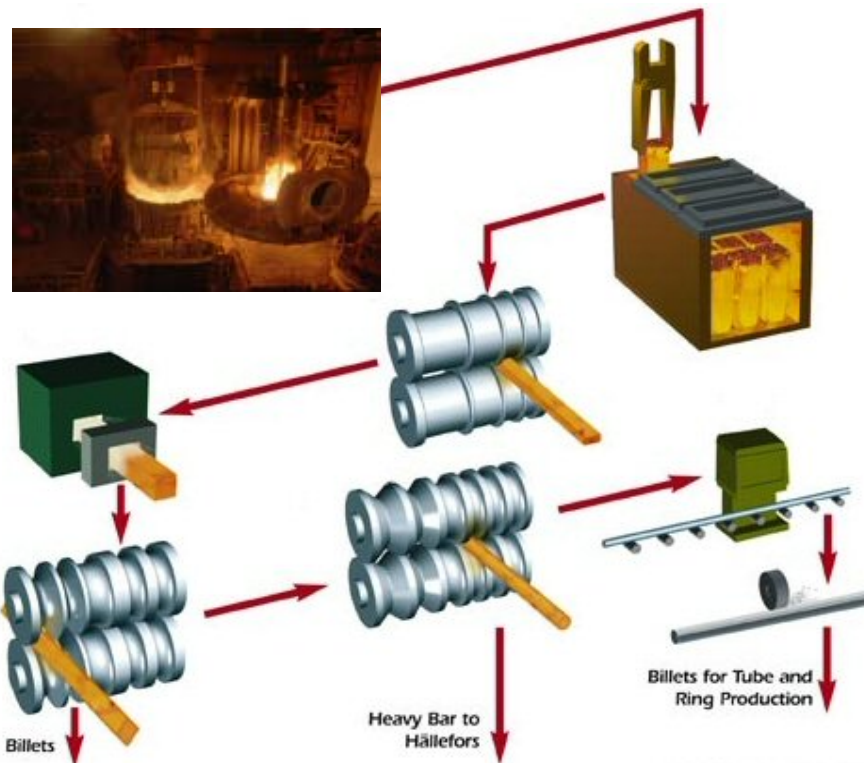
At Ovako Steel cast ingots are reheated in 48 pit furnaces before being rolled in the billet mill. The billets are later reheated in 2 rotary hearths prior to the tube mills. All furnaces are oxyfuel equipped.
